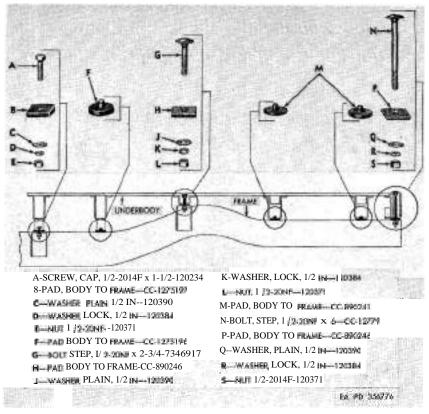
Cargo and command body hold-down bolt, cap screw, and pad locations.
